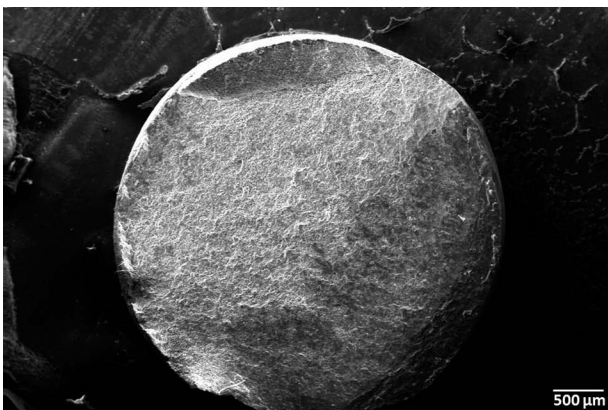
Fracture surface of a room temperature tensile-tested aluminum alloy AA 2024 rivet taken at low magnification
